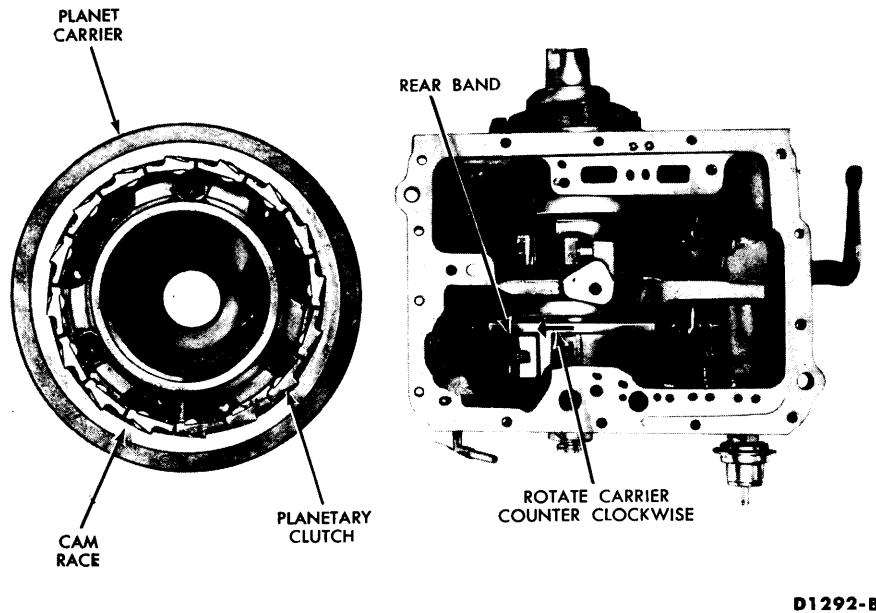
Planetary Clutch Installation in Carrier—Using Chamfered Center Support
